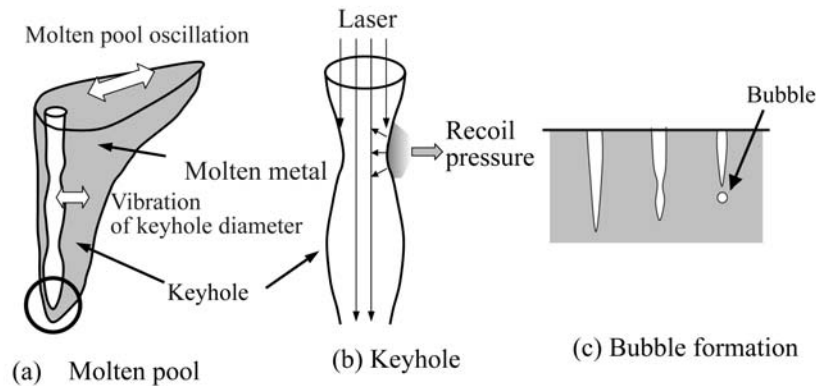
Formation mechanism of bubble in laser welding.
